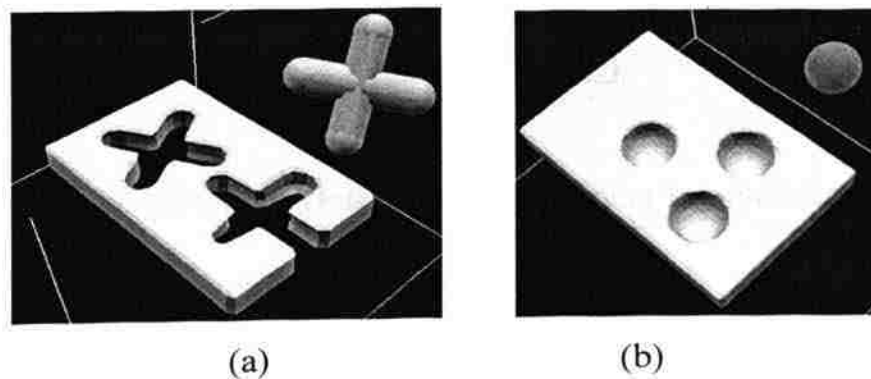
Example of Imprinting Operation. a) Using a Cross-Shaped Tool and (b) Using a Spherical Tool
